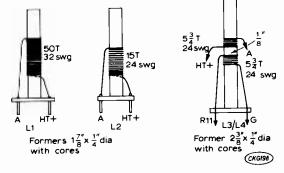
Winding details of the coils for the oscillator and multiplier stages.
